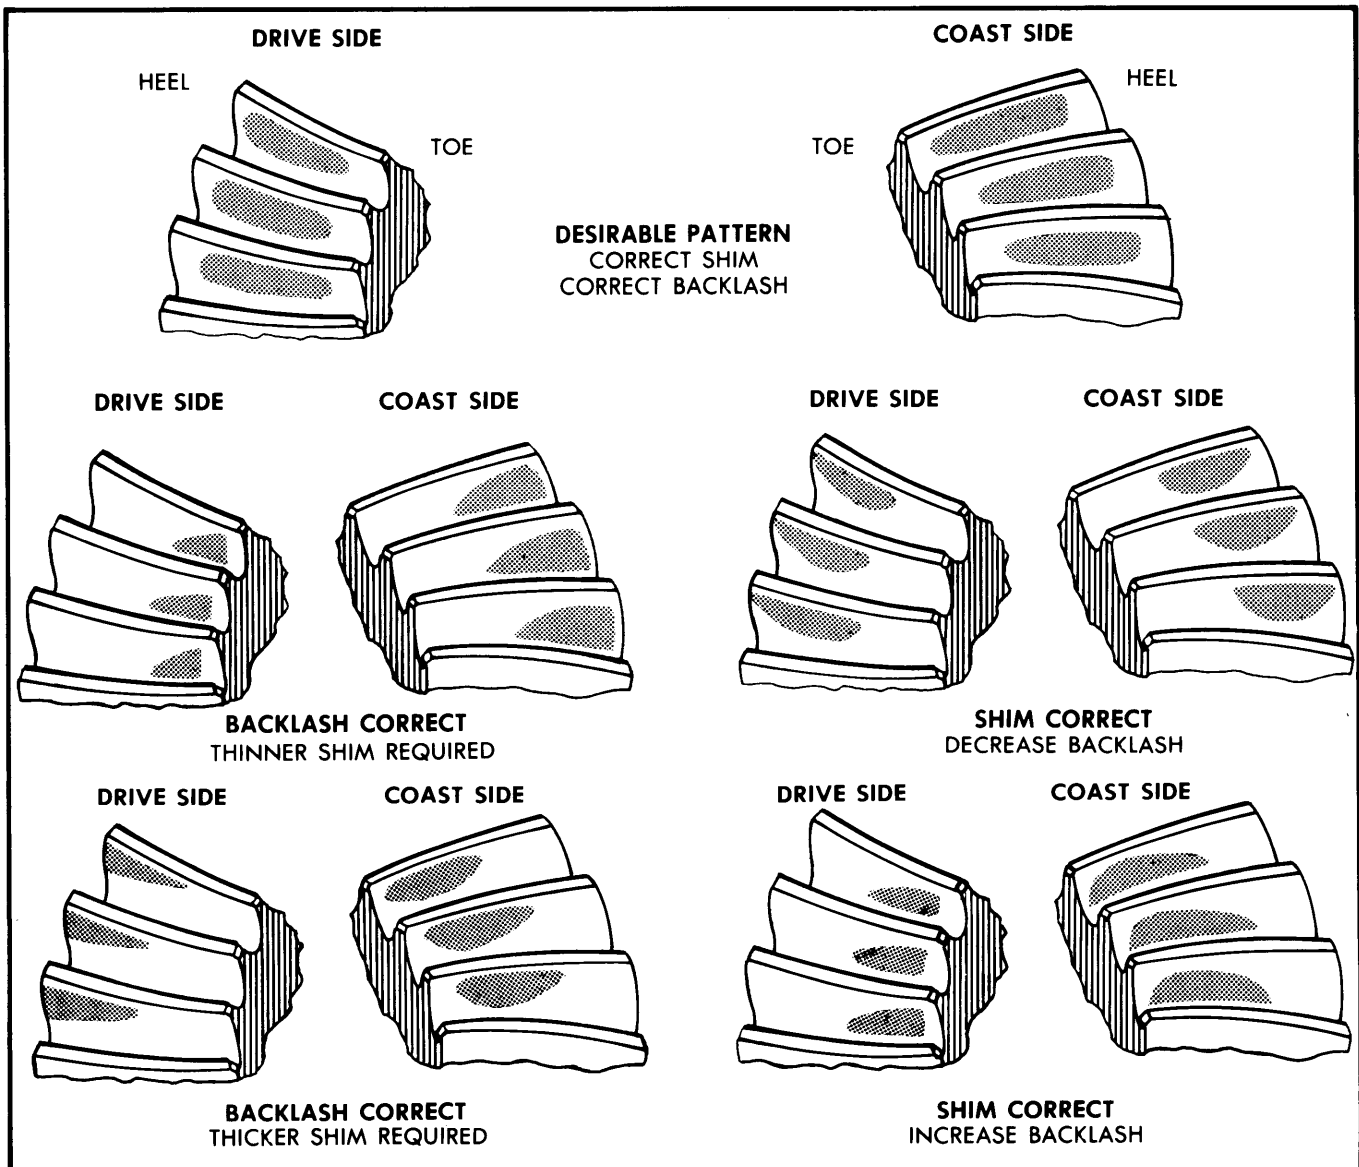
Drive Axle Gear Tooth Patterns Showing Necessary Corrections
